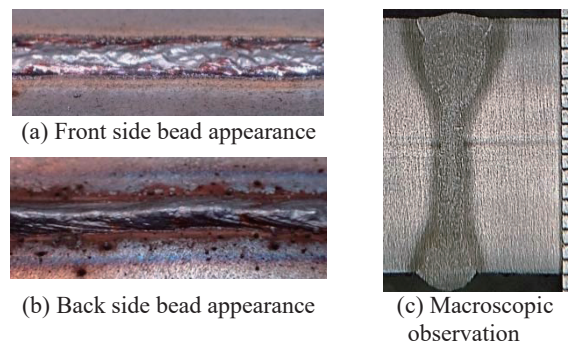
Weld bead appearance and macroscopic observation (ID: B1).
